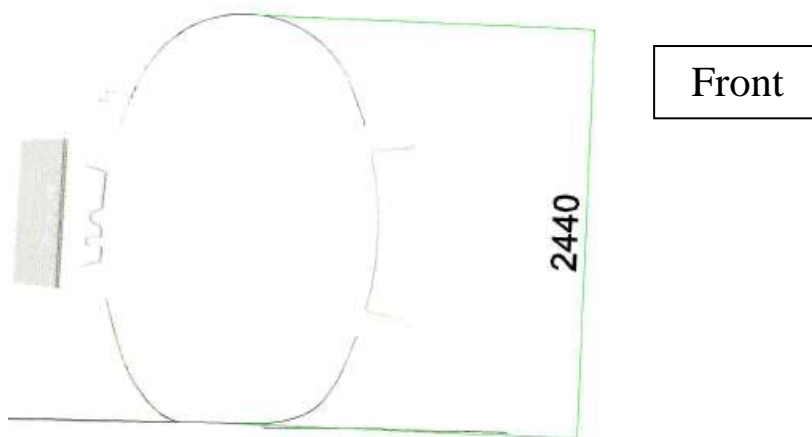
Deformation of GRW tanker J3910 from laser scans after test - front dimensions in mm
